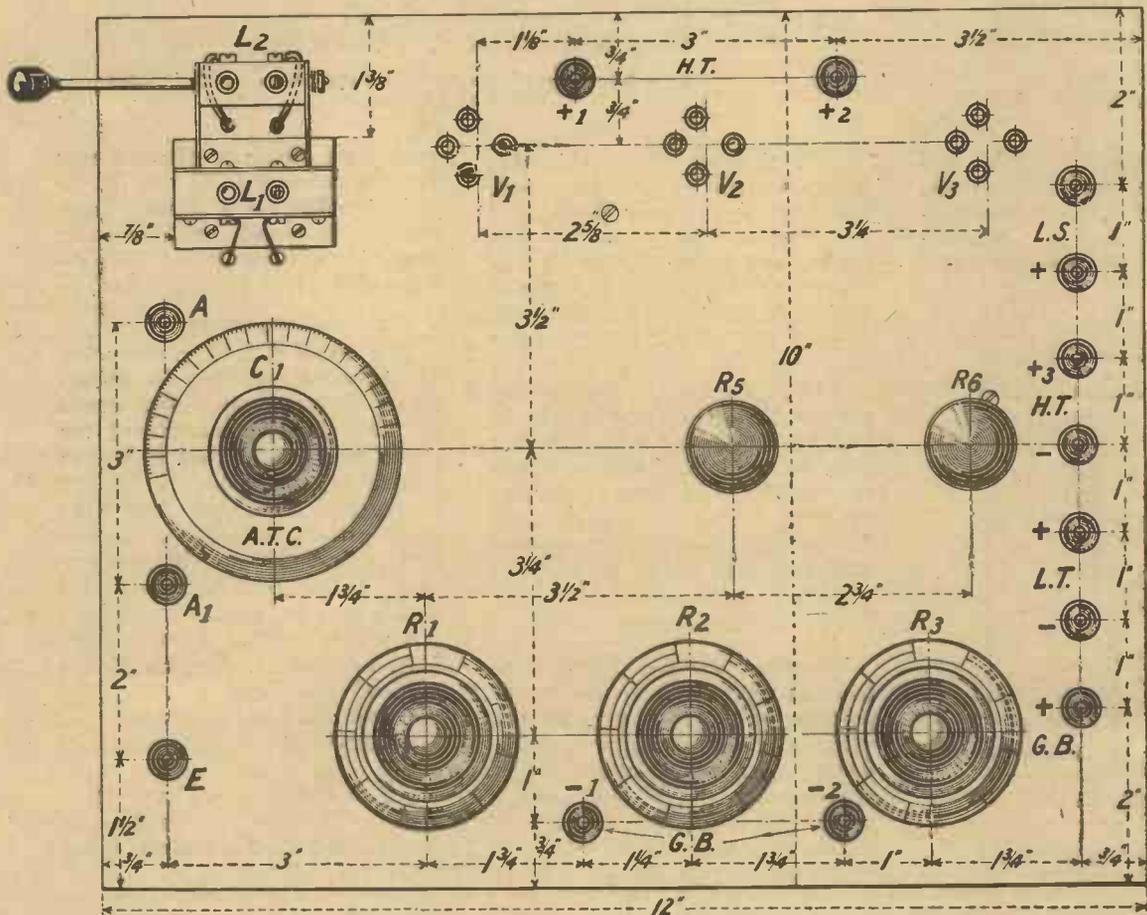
This layout of the panel showing all necessary dimensions may be obtained in Blueprint form upon quoting No. 119A.
